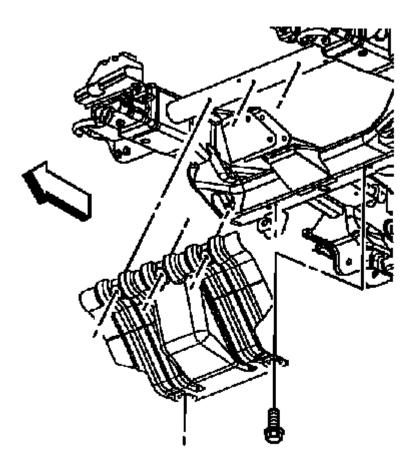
View Of Engine Protection Shield Courtesy of GENERAL MOTORS CORP.
